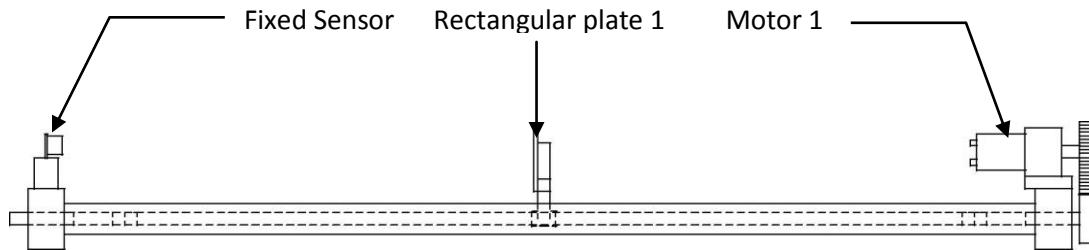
Front View of Lateral Component (all dimensions are in mm)
